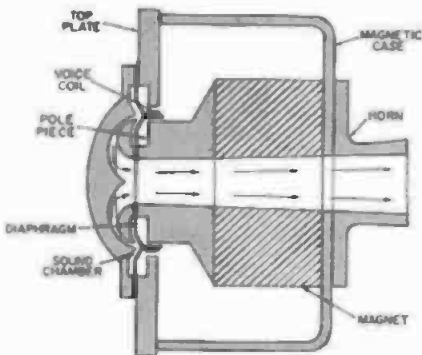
C. Cross-sectional view of horn driver unit using an annular diaphragm and a permanent magnet.
